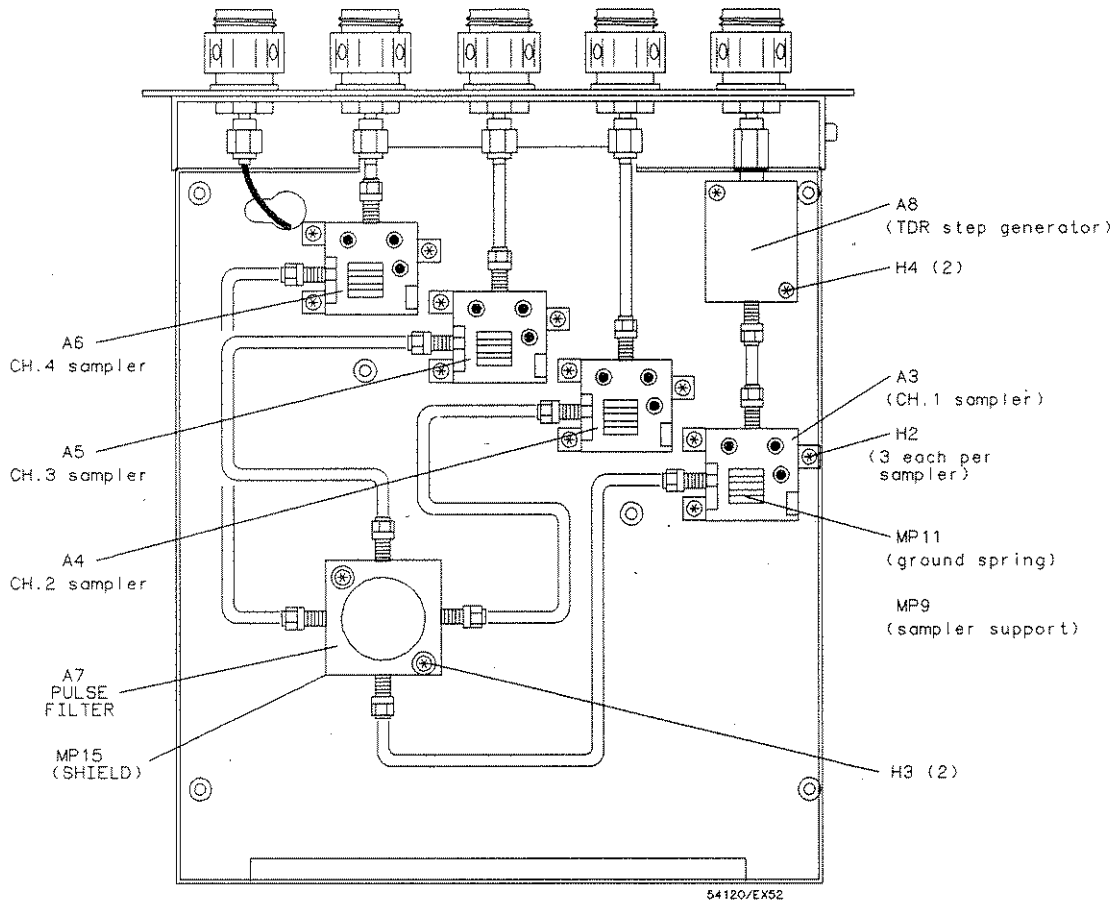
A-7. Sampler and Pulse Filter Assembly Locations
